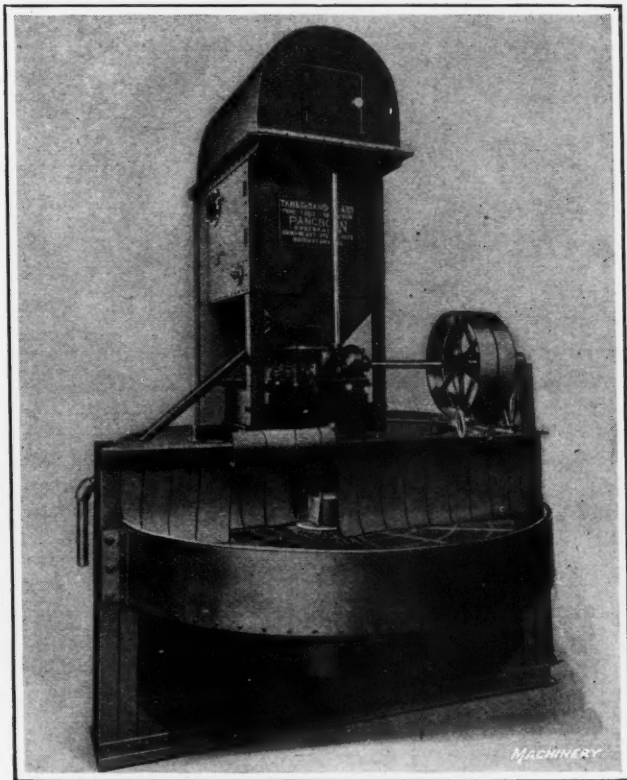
Automatic Rotary-table Sand-blasting Machine with Gravity Feed
